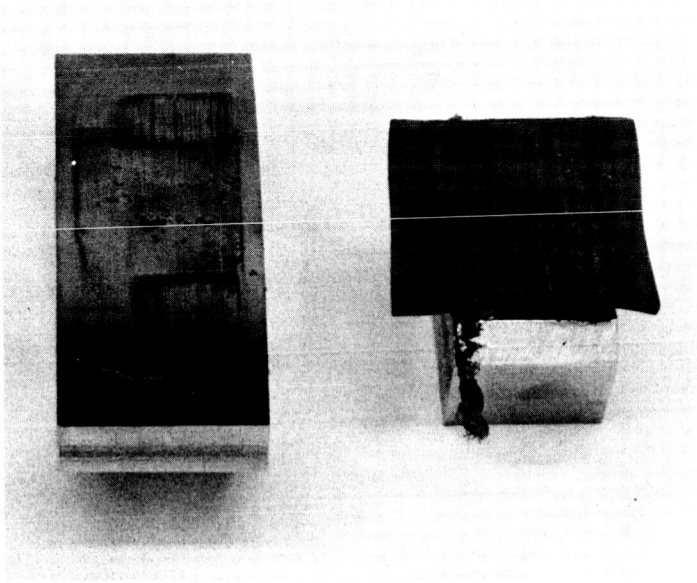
BALL JOINT TEST SPECIMEN TYPE - 21;
